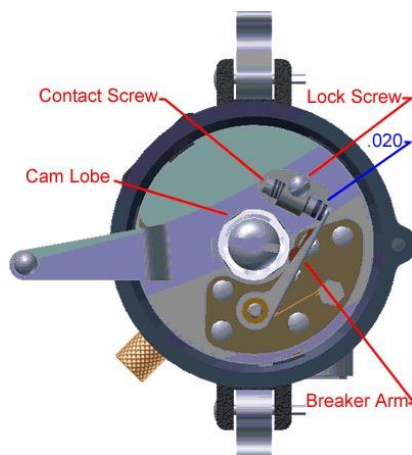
Main parts of the Mechanical Breaker point Ignition System.
